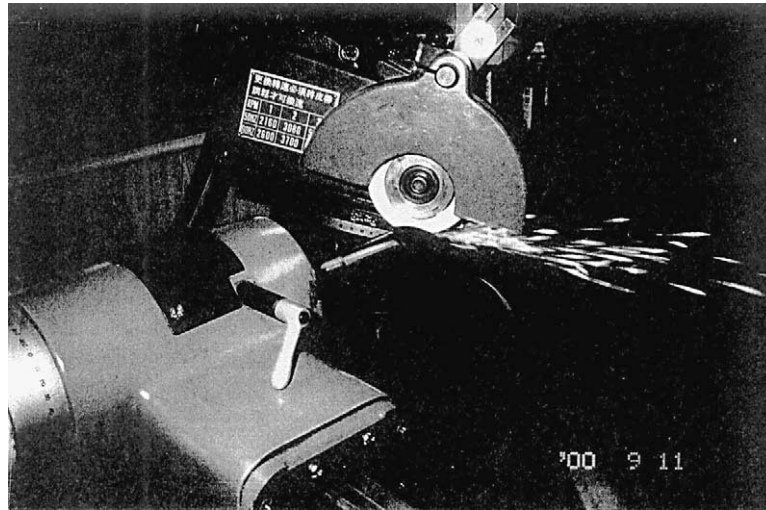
Grinding a three-fluted drill on a universal tool-grinding machine.
